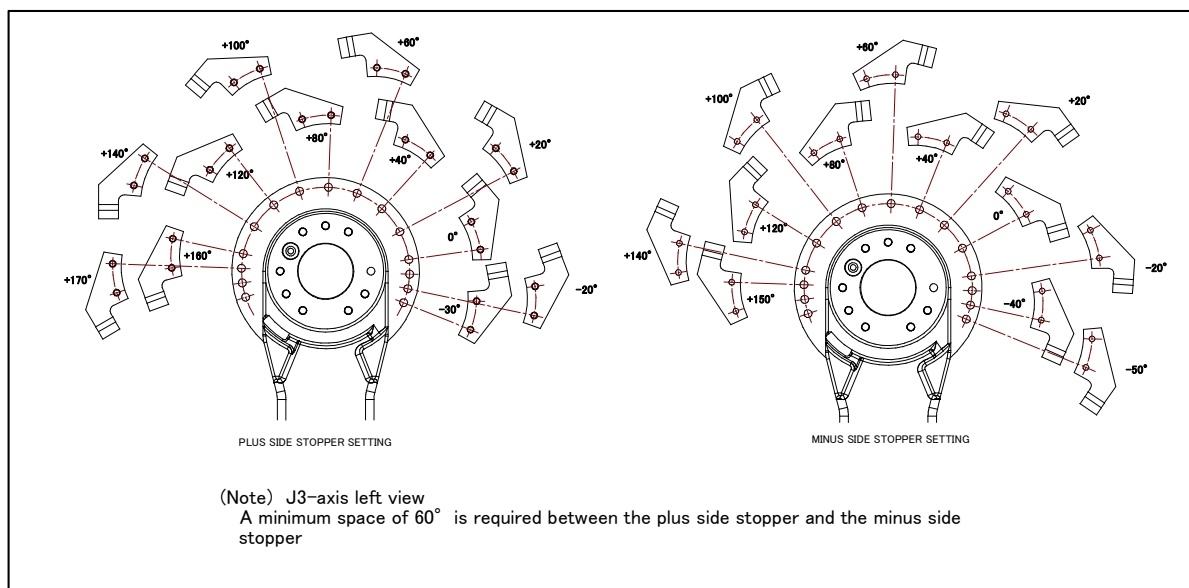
(e) Attachment of J3-axis adjustable mechanical stopper
